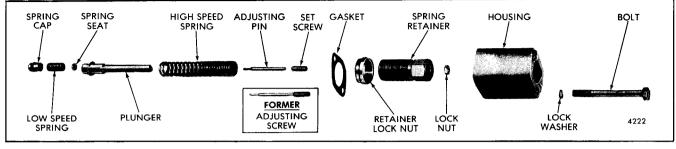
Governor Spring Assembly Details and Relative Location of Parts
